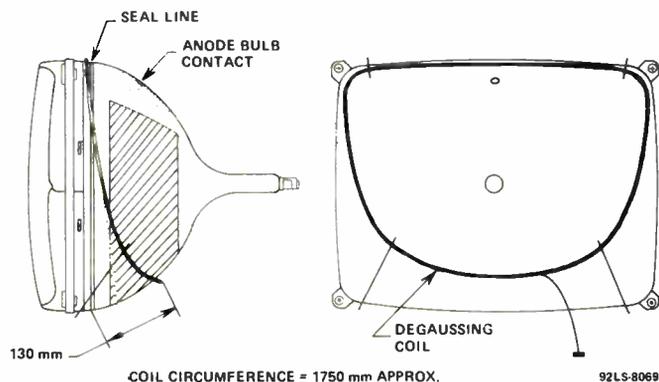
Relative Placement of Typical Tilted "Z" Degaussing Coil
